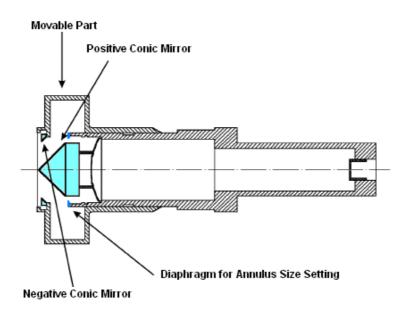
Schematic drawing of optical scanner used for radial measurements.
